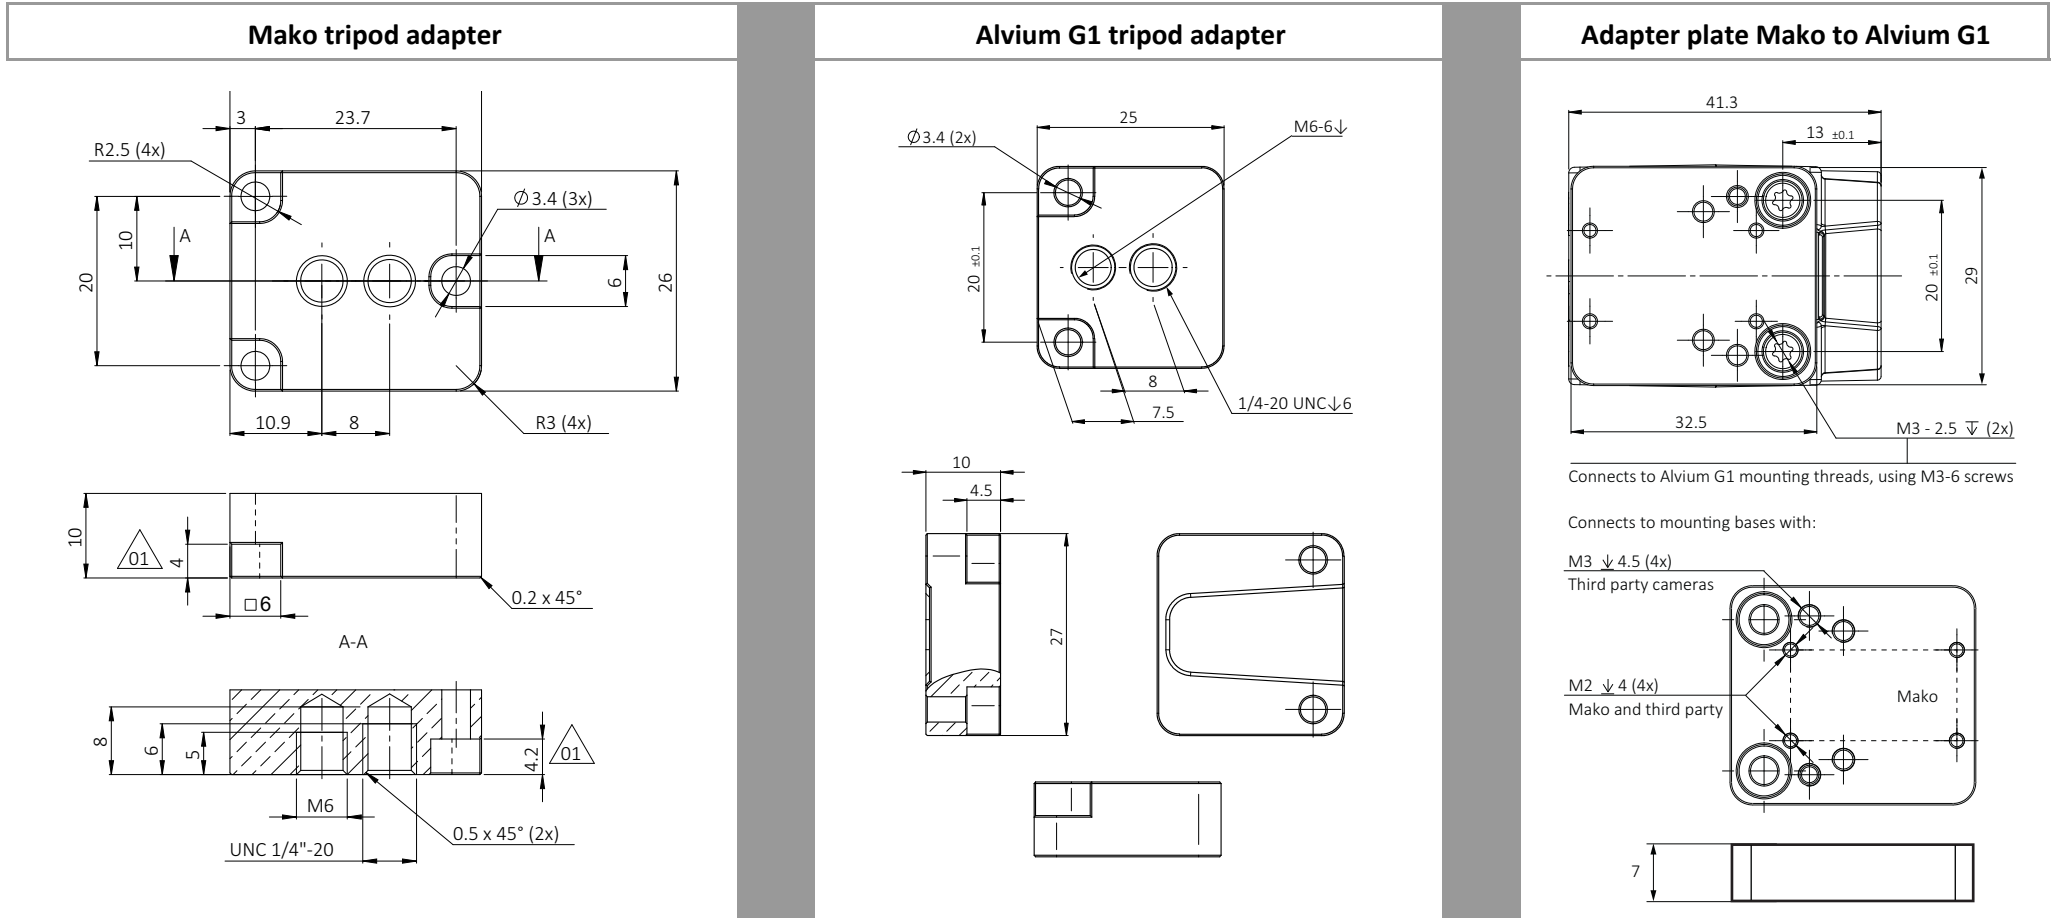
Technical drawings mounting adapters | Mako versus Alvium G1
